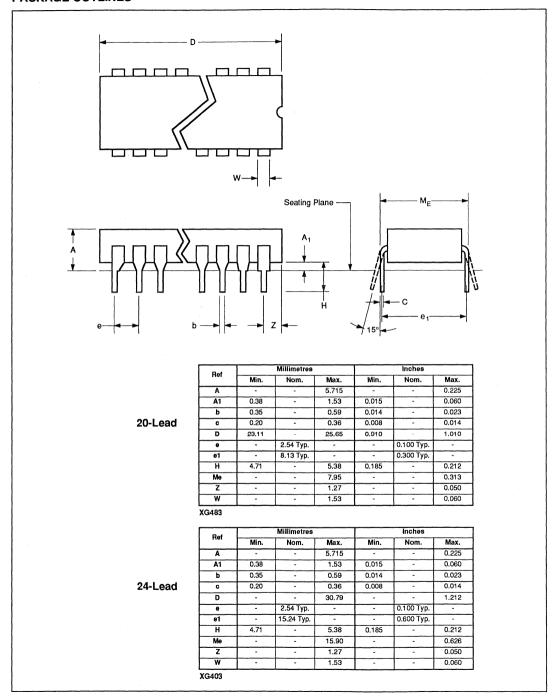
20/24-Lead Ceramic DIL (Solder Seal) - Package Styles C, D and X
